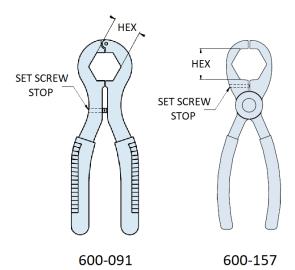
Set Screw Location for 600-091 Hex Wrench and 600-157 Hex Pliers (size 8-12 only)
